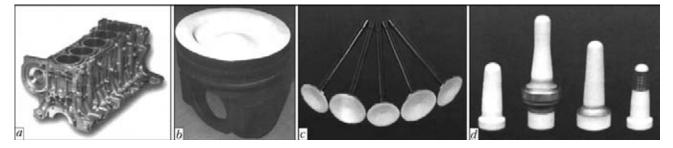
ICE parts with TBC: a - engine cylinders; b - piston; c - exhaust valves; d - exhaust sensor, oxygen sensor
